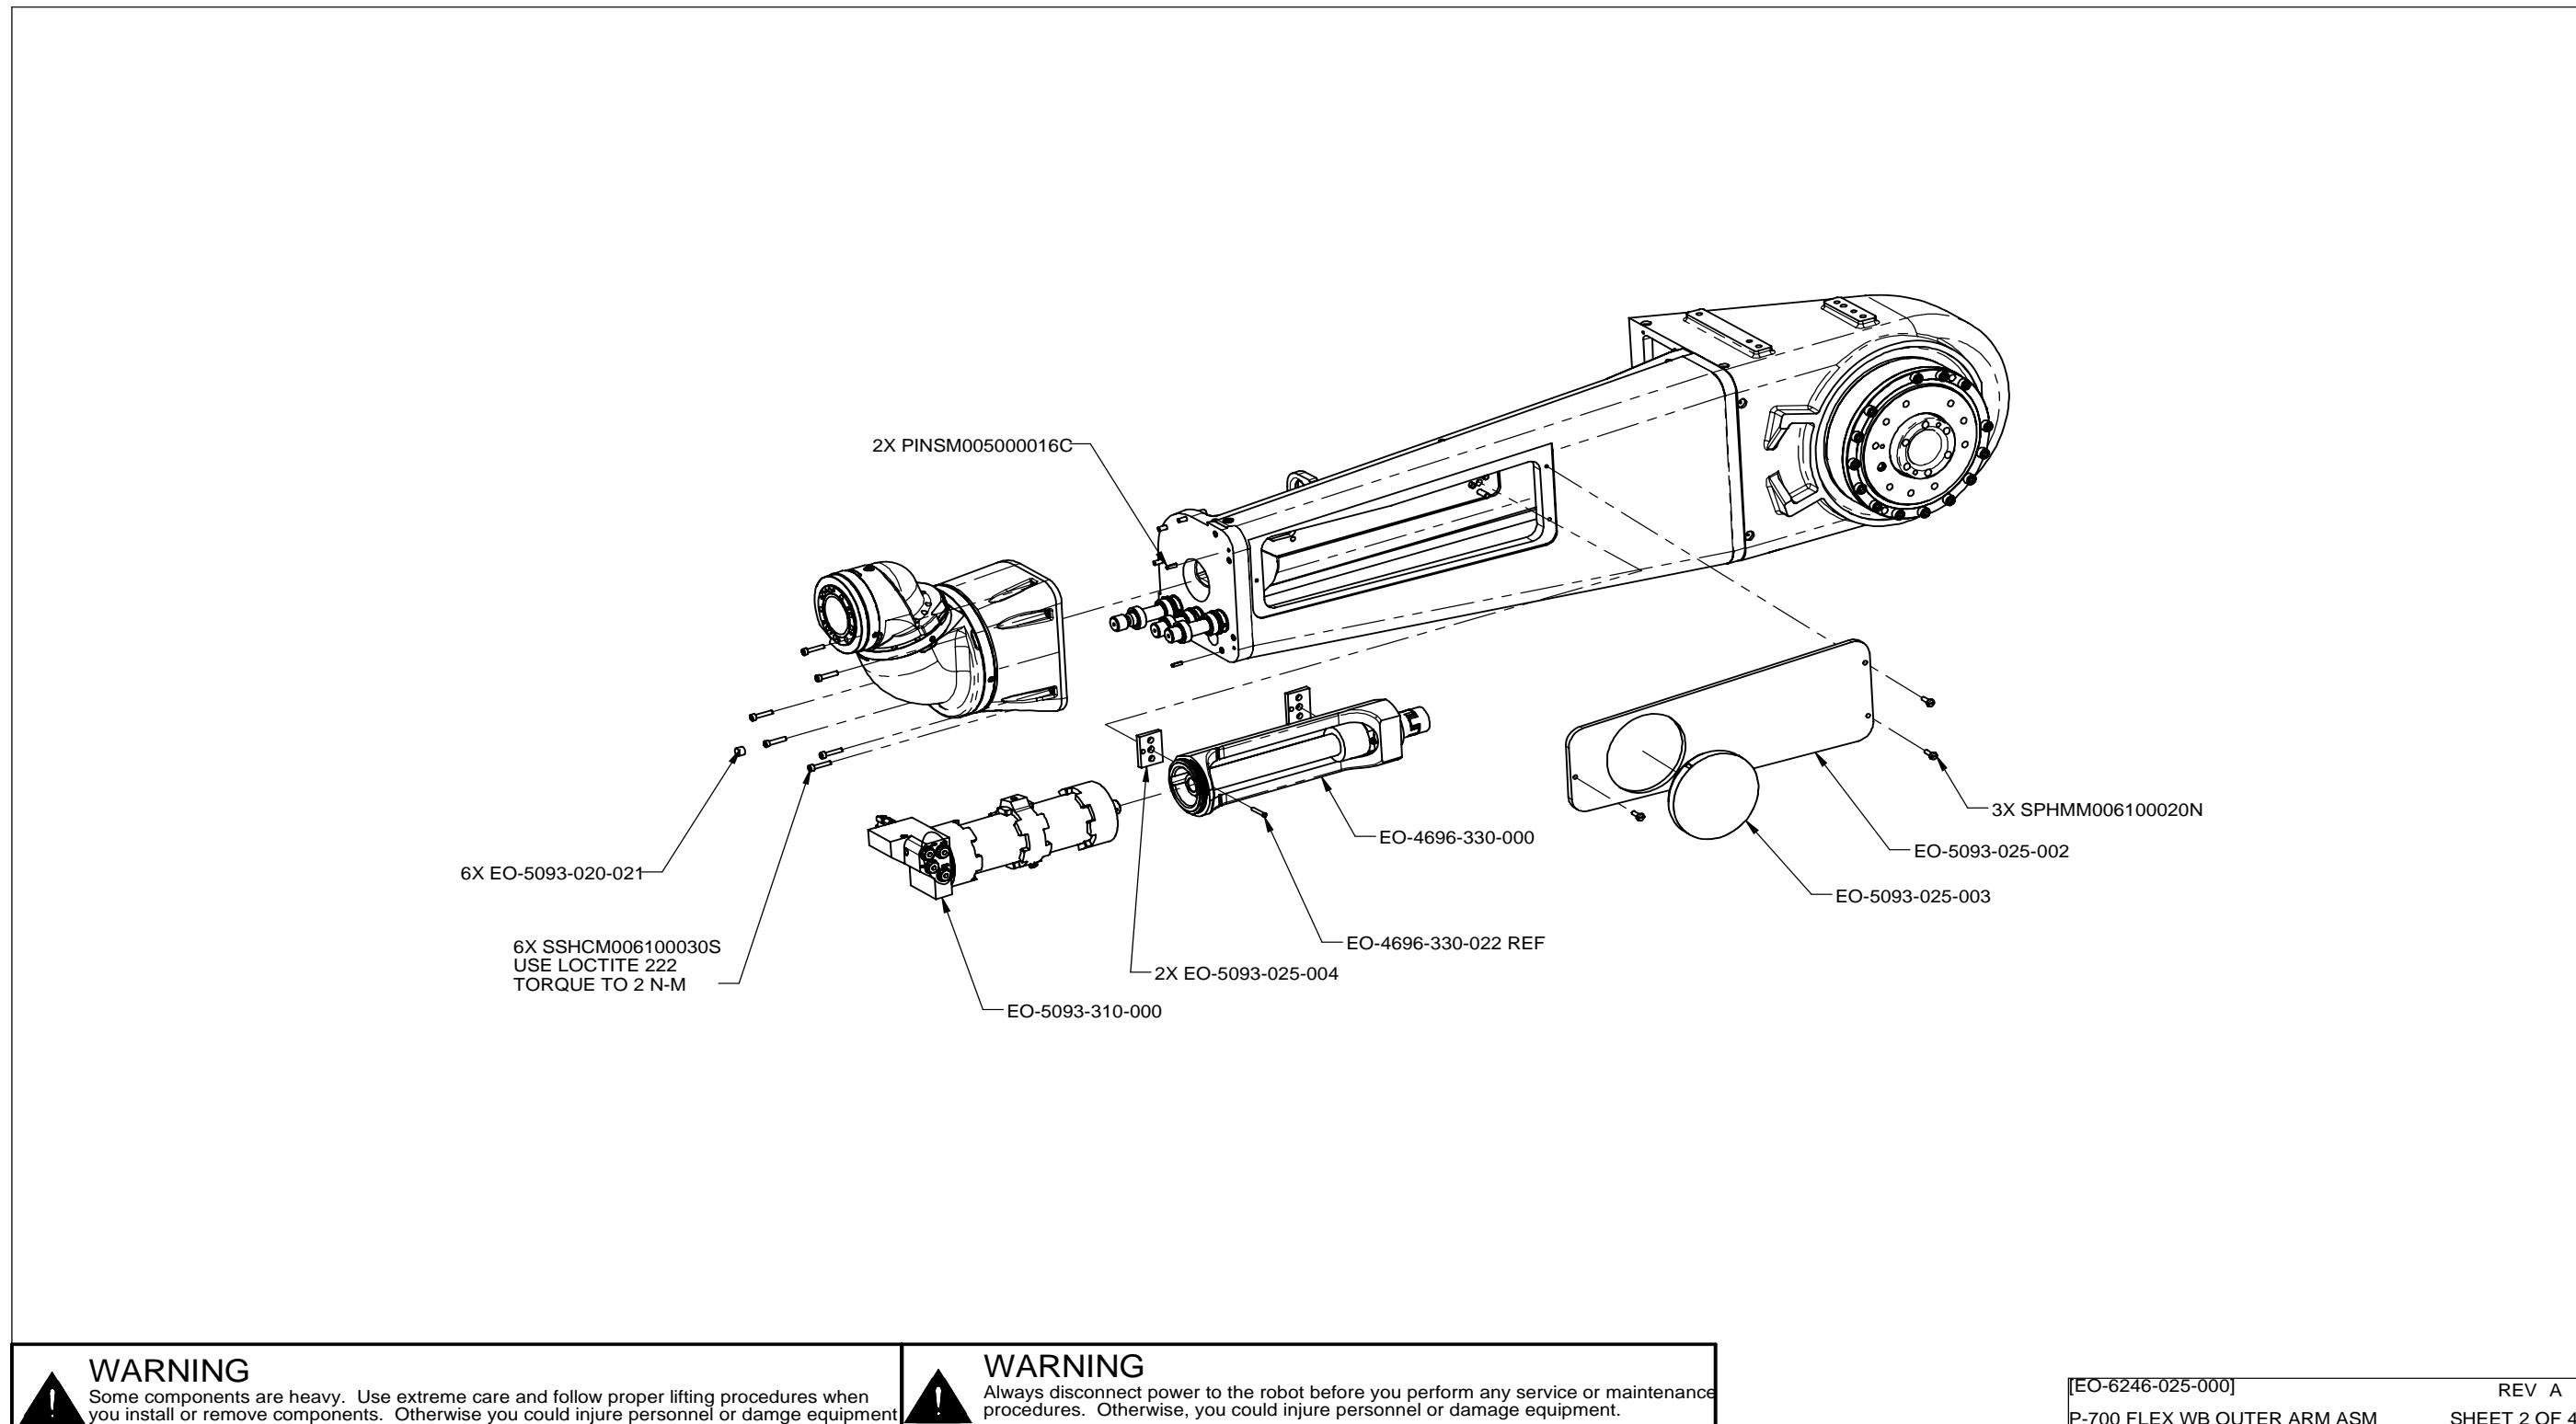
EO-6246-025-000 Sheet 2 of 4, P-700 FLEX WB OUTER ARM ASM
